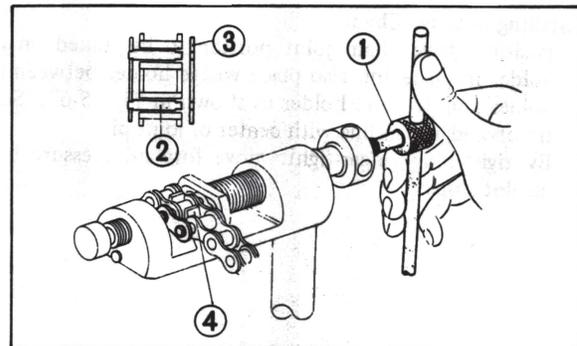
(1) Pressure bolt B (2) Joint pin (3) Joint plate (4) Chain holder
